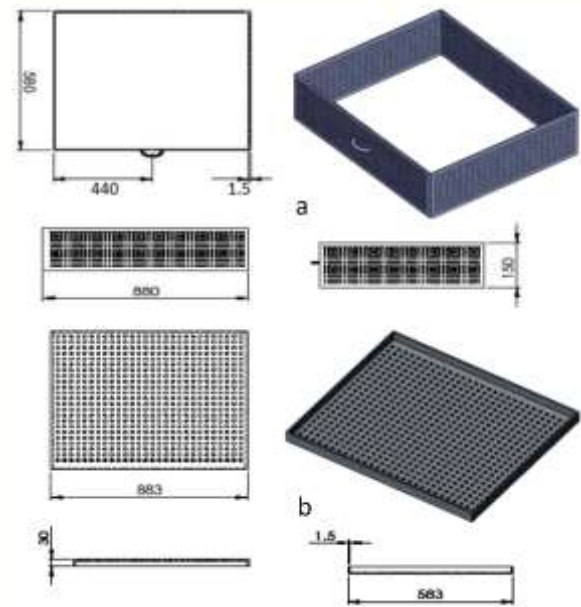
Design of (a) tofu mould container cover, (b) tofu mould container base.
